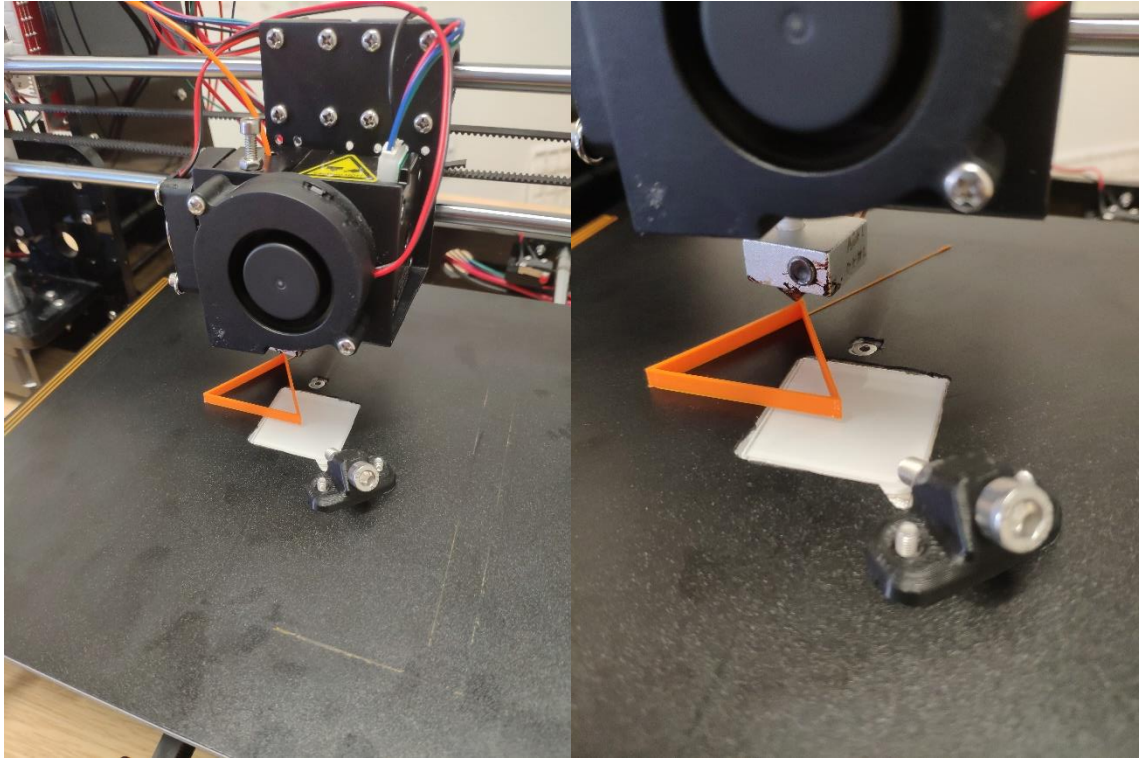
Experimental machine setup utilising a modified print bed with removable slide on ANet A8 ME AM Desktop printer for XY plane experimentation
